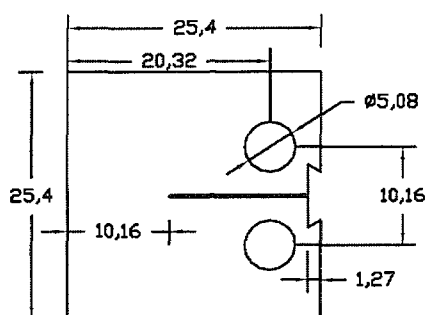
Sketch of 6.4 mm (0.25 inch) thick compact tension specimen design (dimensions are shown in mm).
